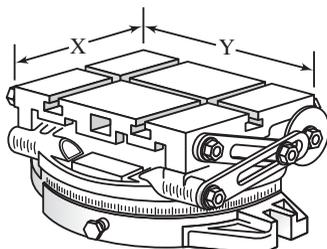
Type IV, Machinist's Adjustable Angle Plate    Fig. 5. Type V, Toolmaker's Adjustable Knee
